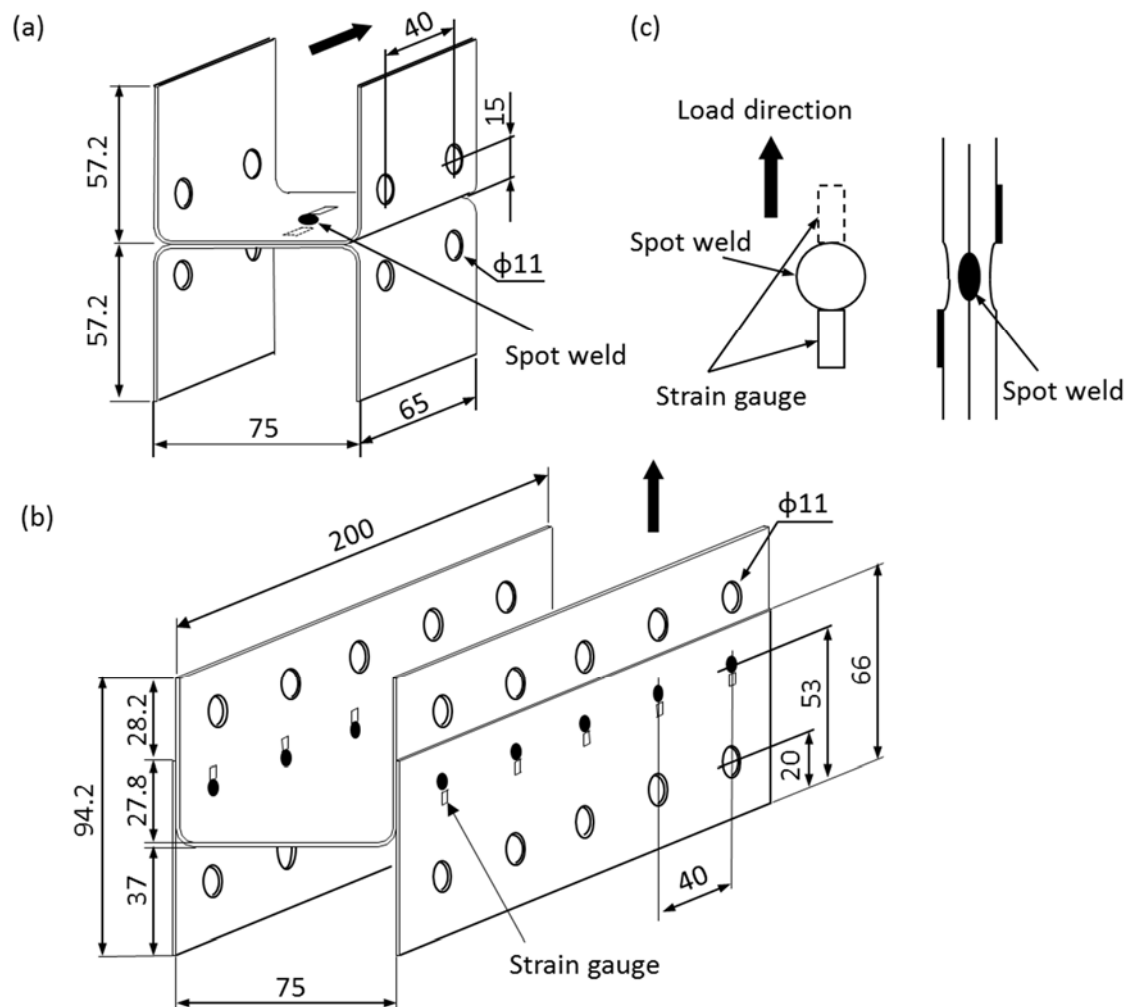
Shapes and dimensions of spot welded specimens. (a) Single spot welded specimen, (b) multi-spot welded specimen, (c) positions of strain gauges.
